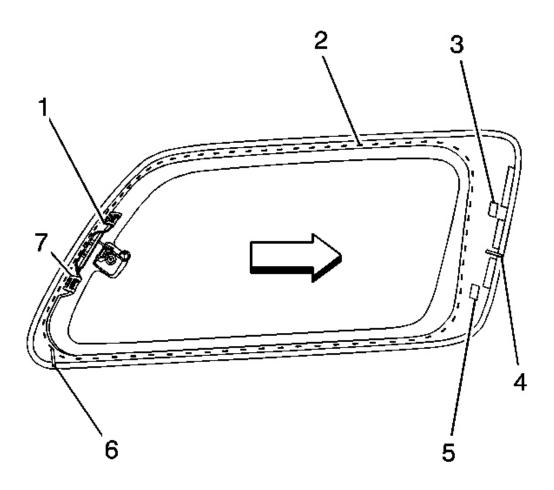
View Of Actuator Arm, Window Hinge Screw & Actuator Retaining Nuts Courtesy of GENERAL MOTORS CORP.
